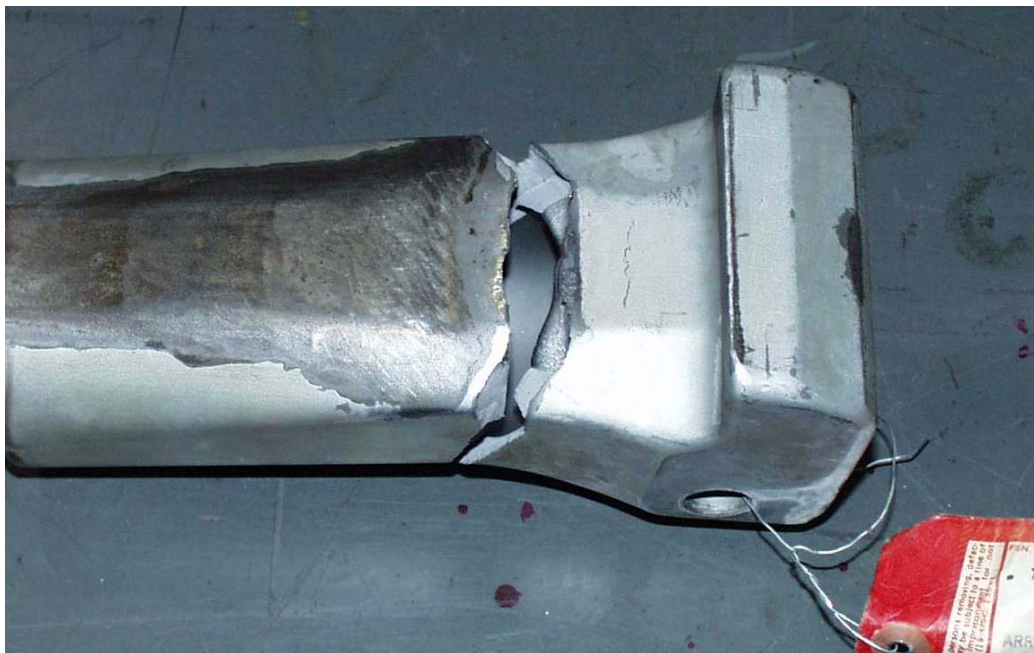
Fatigue Test Failure Location for Shank PT0735 (Bottom View)
